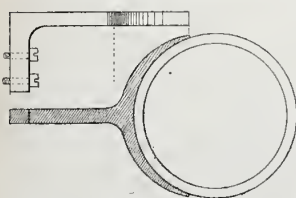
CASTING FOR FASTENING FIXED WHEEL
